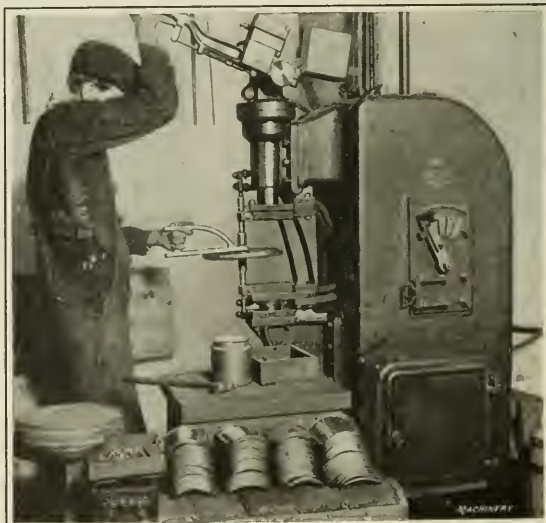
Electric Riveting of Cream Separator handled on a Toledo Electric Welder
